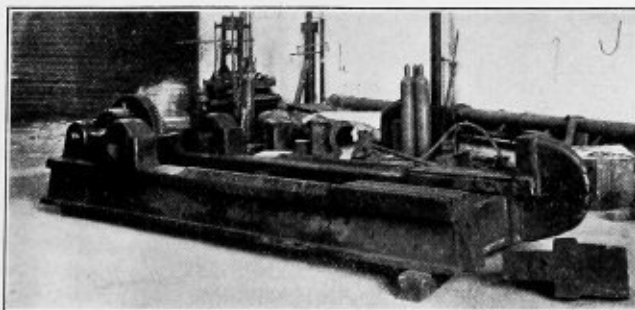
Bulldozer Bedplate, With Fractured Head
